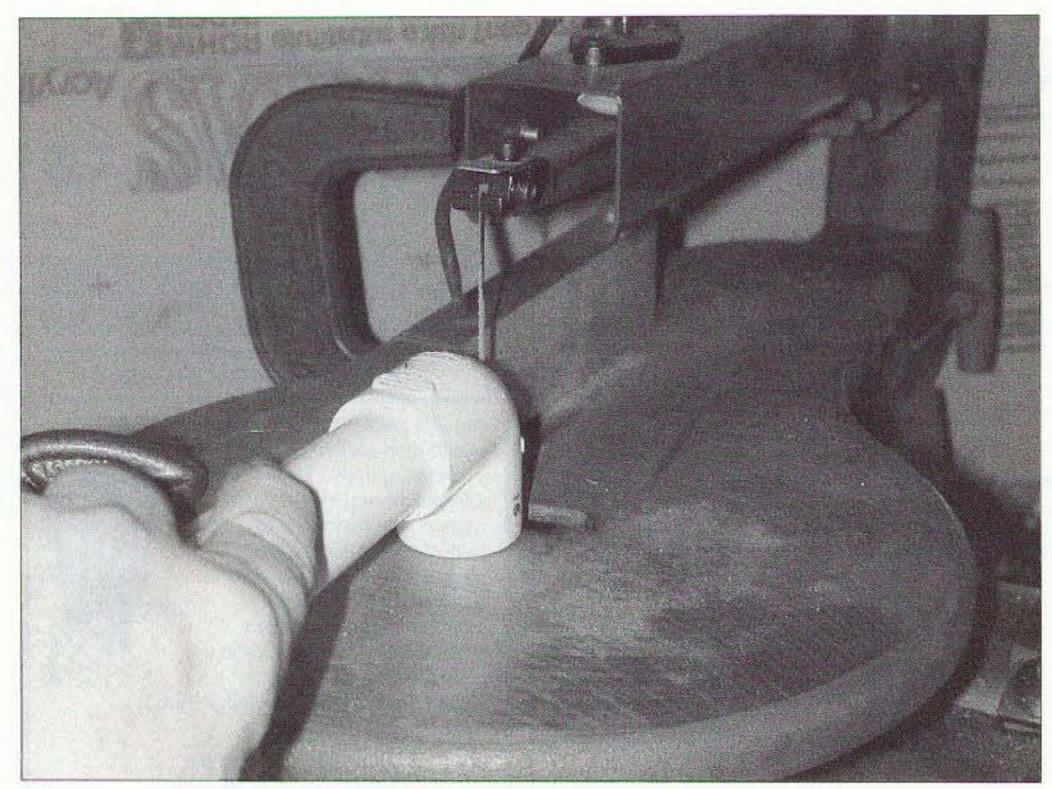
Photo G. Cutting the 90-degree elbows with a scroll saw, using a pusher tube.
